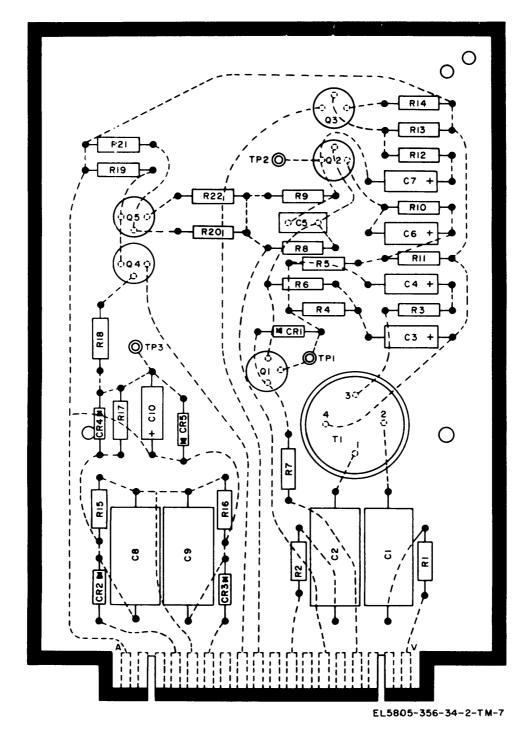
Vf to 20-Hz card 3A1 component layout and wiring diagram.
